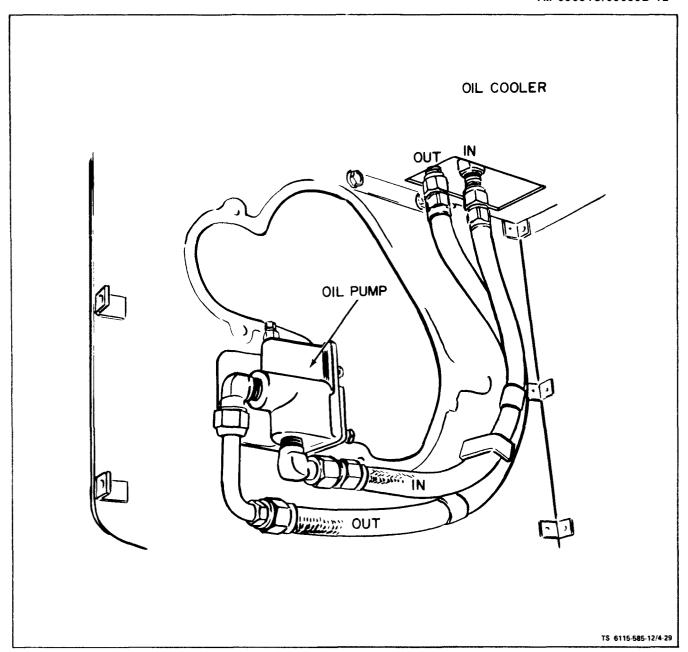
Replacing Oil Cooler Hoses (Early Model MEP-003A Only)
